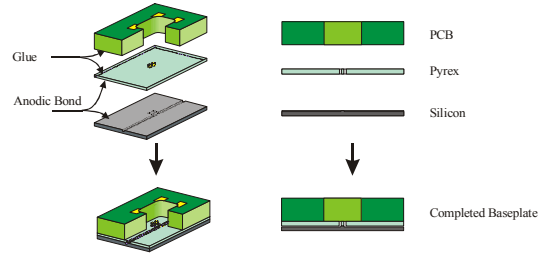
Example of a wet circuit board, where the modules will be mounted [5]
